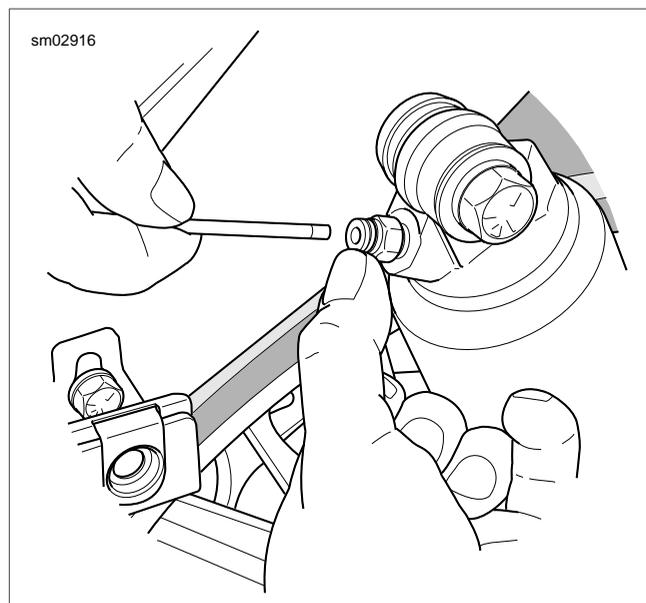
Depress Collar on Fitting and Pull Out Air Inlet Tube
